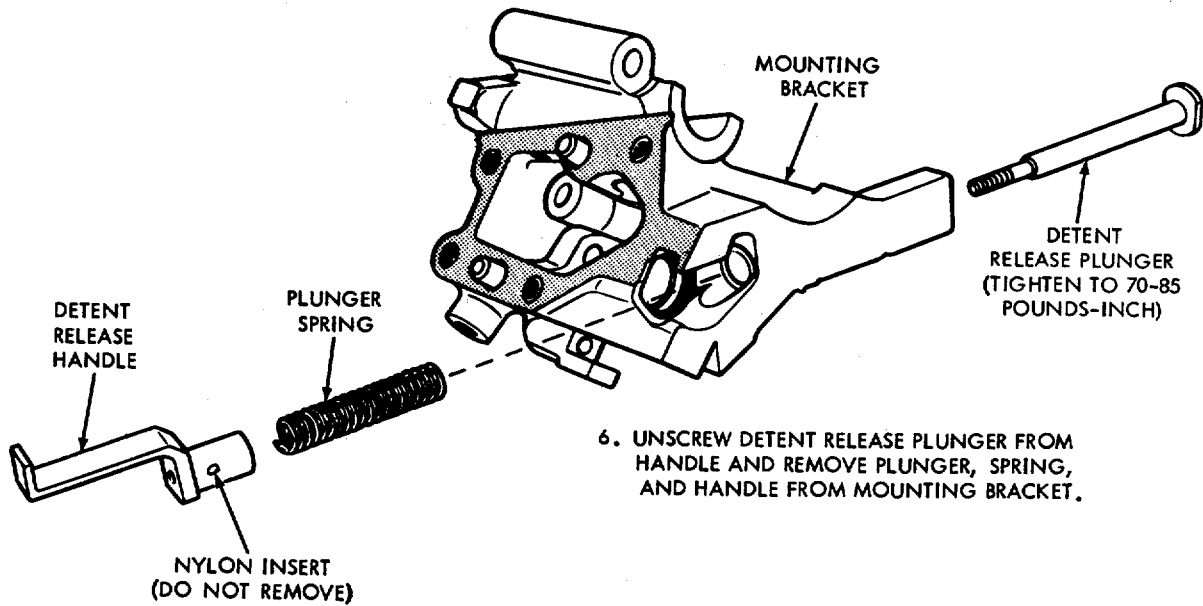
Disassembly/assembly - loading tray bracket assembly (2 of 3)
